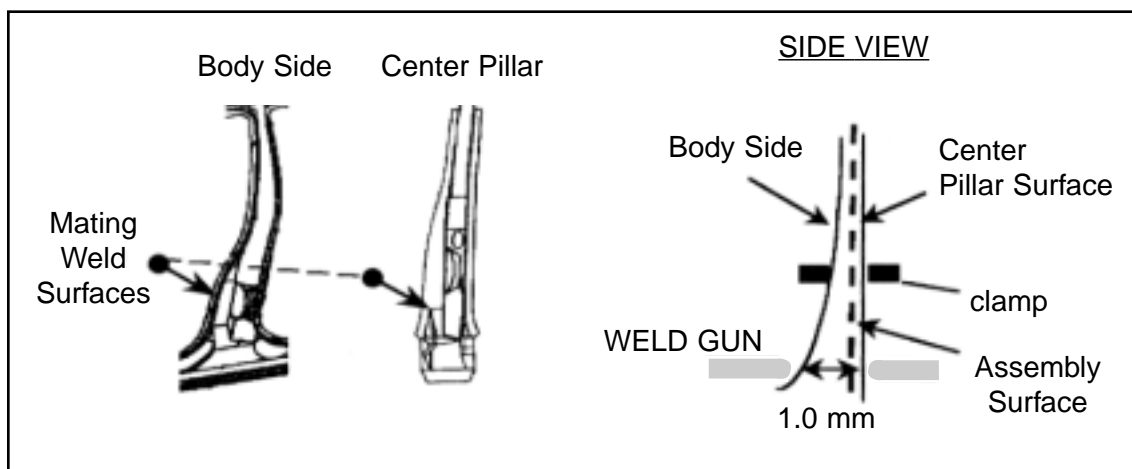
Parallel Assembly of a Non-rigid Surface to a Rigid Reinforcement
